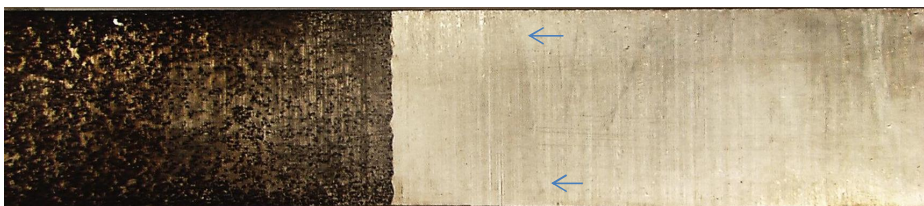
Global view of the weld, showing the SA508 plate (dark), the weld metal and the Alloy 690 plate (arrows mark the interface between Inconel 152 weld metal and Alloy 690 base metal).
